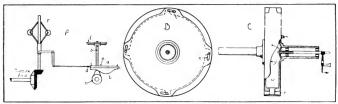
Theoretical Drawing of Gas Turbine Components: A, Regulator for Controlling Gas Charget B, End View of Resulting Explosion Chamber: C, Section Through Same,
